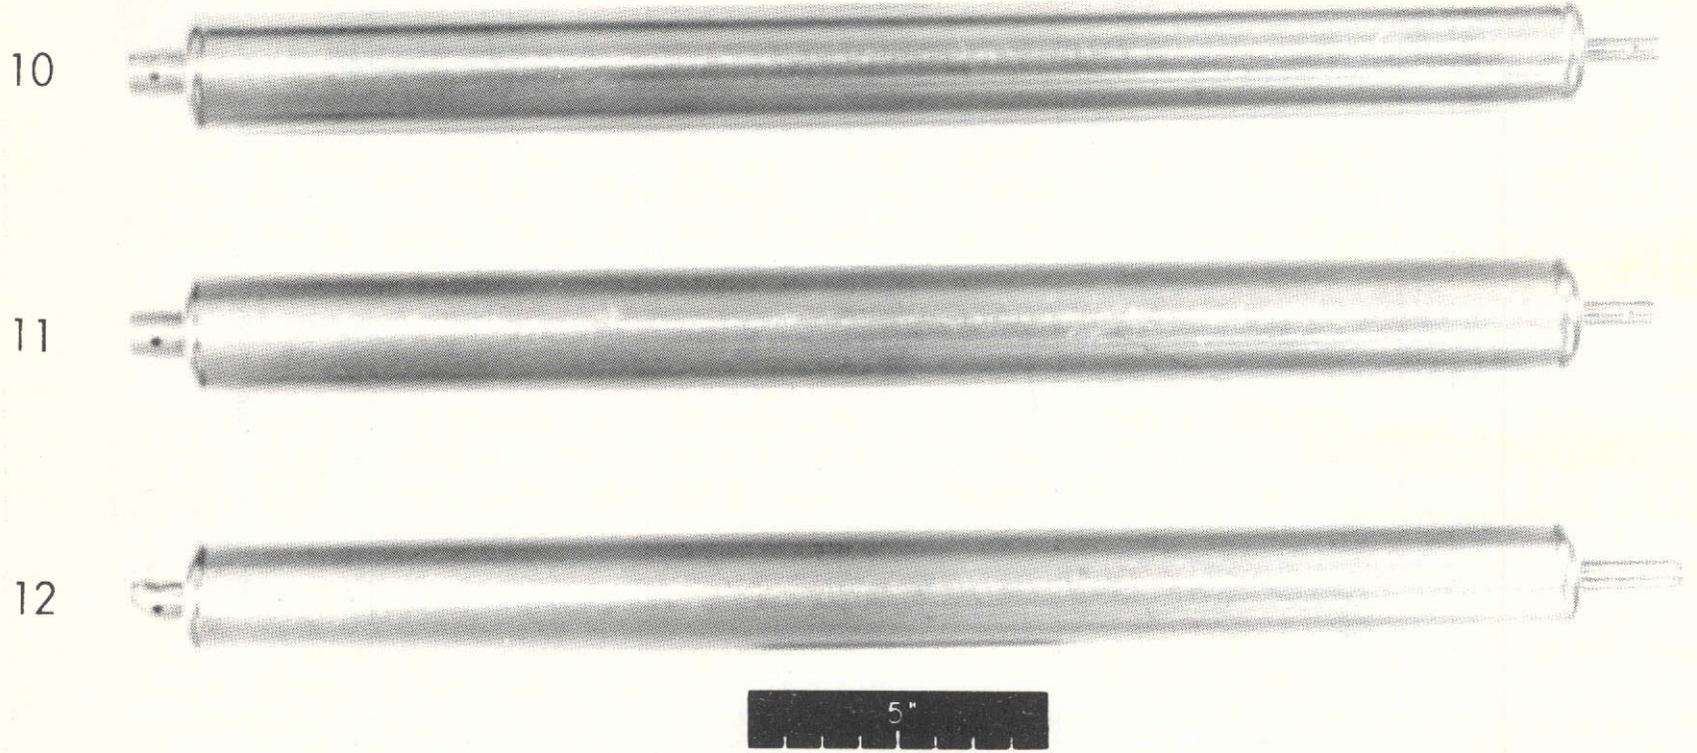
Completed fuel pins ready for installation in capsule UN-4.
